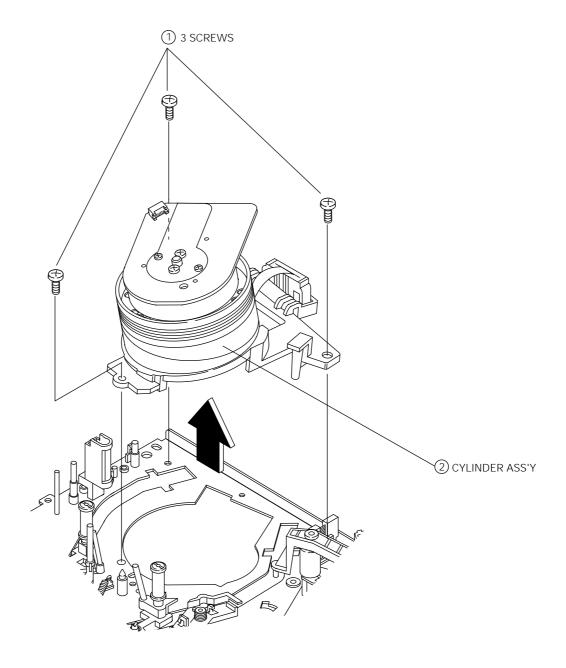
Cylinder Ass'y Removal from Main Base
